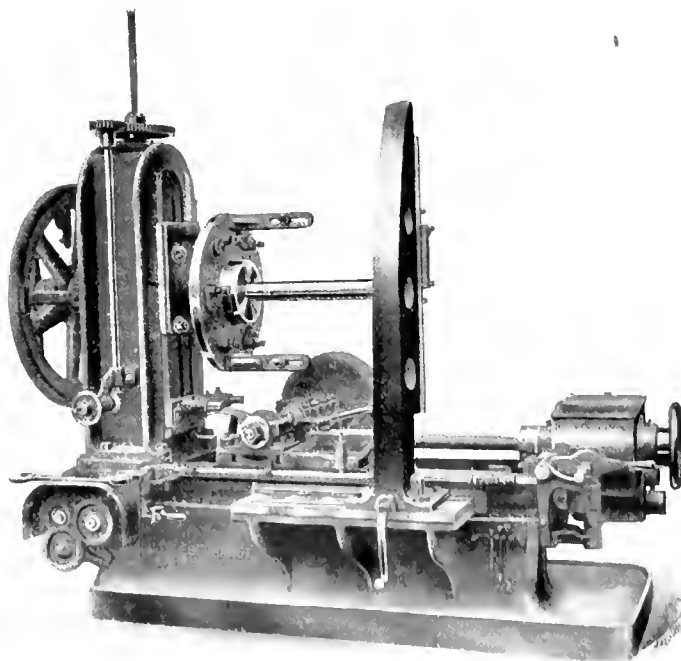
Specialized Design of the Gould & Eberhardt Automatic Gear-cutter for Heavy Motor Gear Work.
